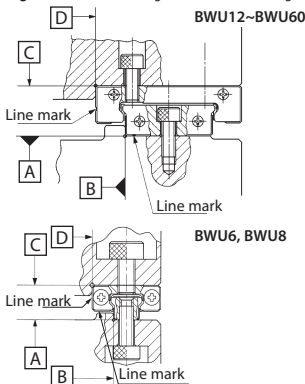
Shoulder height of the mating reference mounting surfaces.
